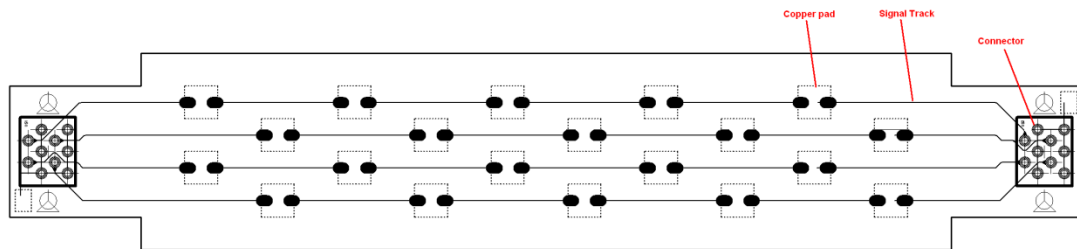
This shows the layout of the tracks in the heat sink for the tracks. The heat sink has copper tracks, with several larger pads, on a polyimide layer clamped between two copper cover layers.
